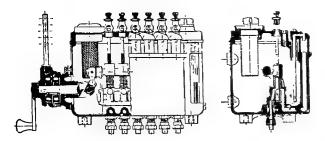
Sectional drawing of the D.S.I. Lubricator.
